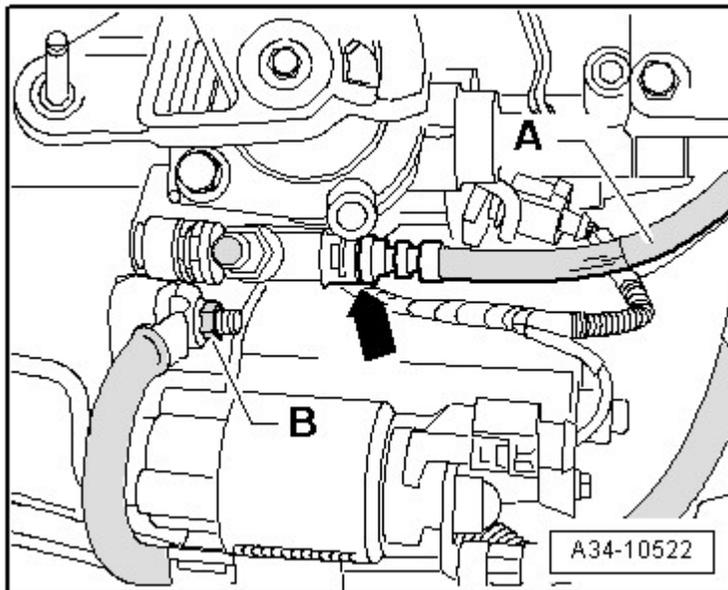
Identifying Hose/Line Assembly -A-, Ground (GND) Cable -B-
